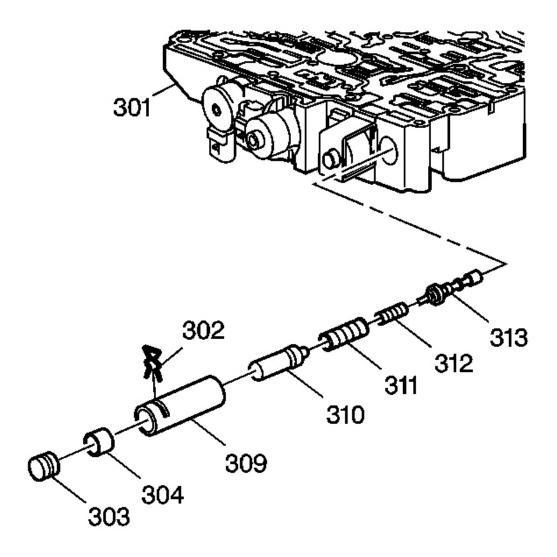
View Of Reverse Boost Valve Bushing Assembly Components Courtesy of GENERAL MOTORS CORP.
